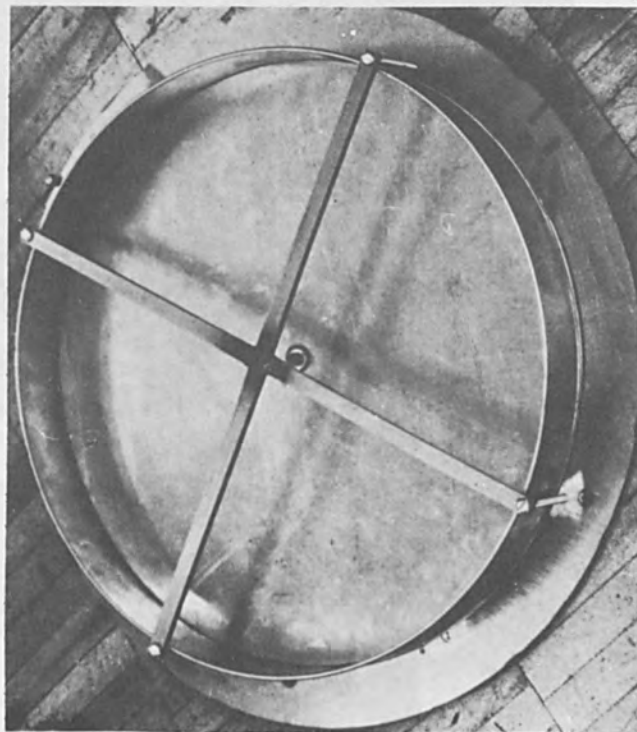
Stainless-steel drum assembled with EB welder and rotary table eliminates the much-needed straightening operations of conventional welding practice.
